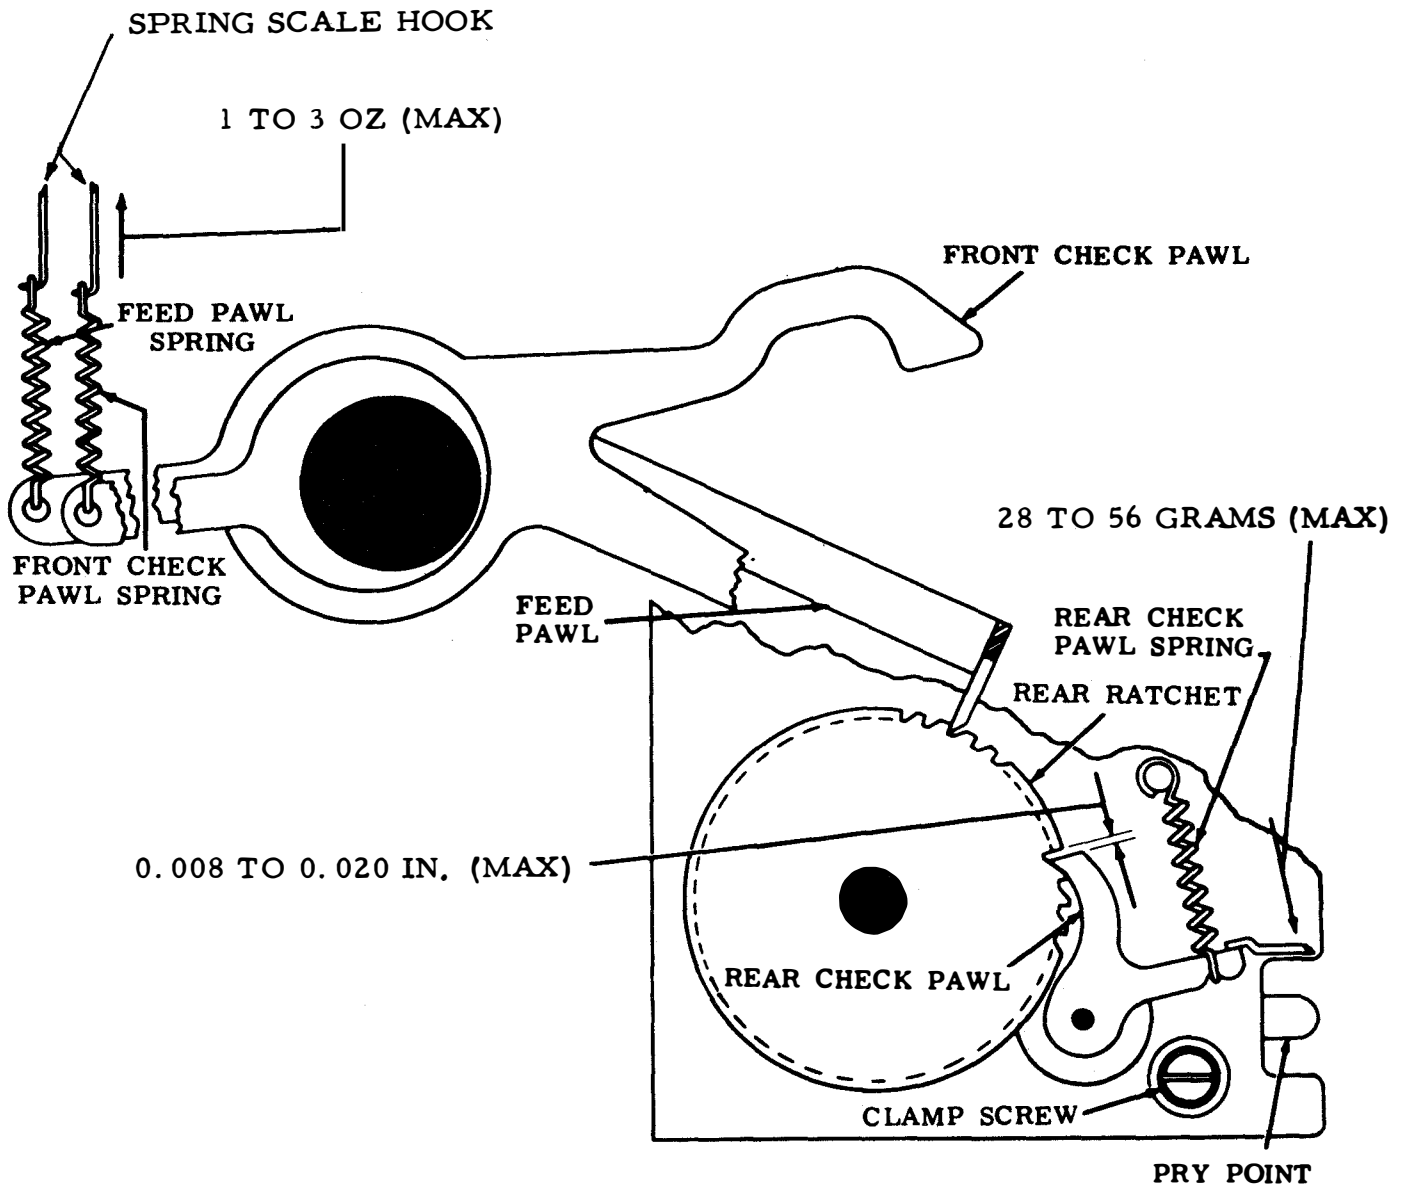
Rear Check Pawl, Rear Check Pawl Spring, and Feed Pawl and Front Check Pawl Springs
